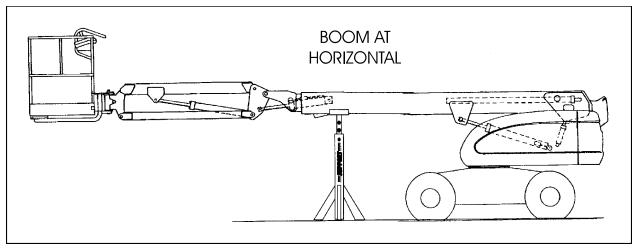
Boom Positioning and Support, Cylinder Repair (S Models)
